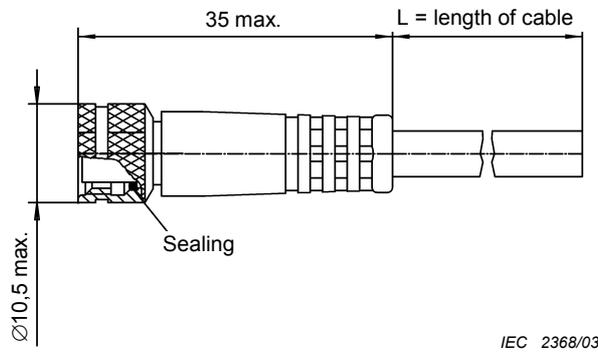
Non-rewireable connector, straight version, with locking nut, female contacts
